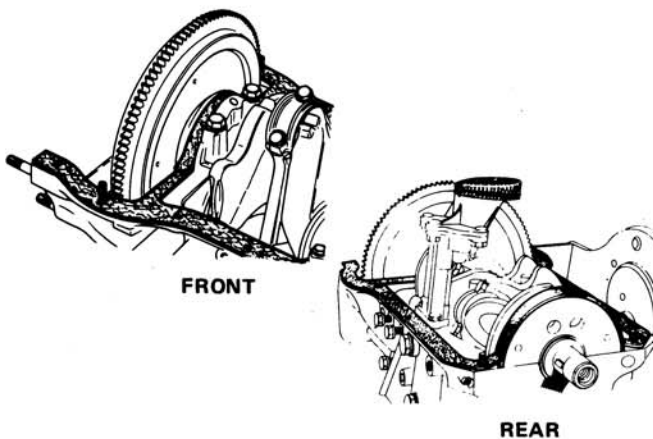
INSTALLING OIL PAN GASKETS FRONT AND REAR
